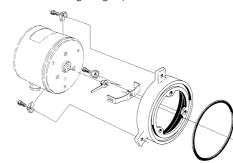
Accessory kit for pressure gauge mounting (see "Feature 12.")
